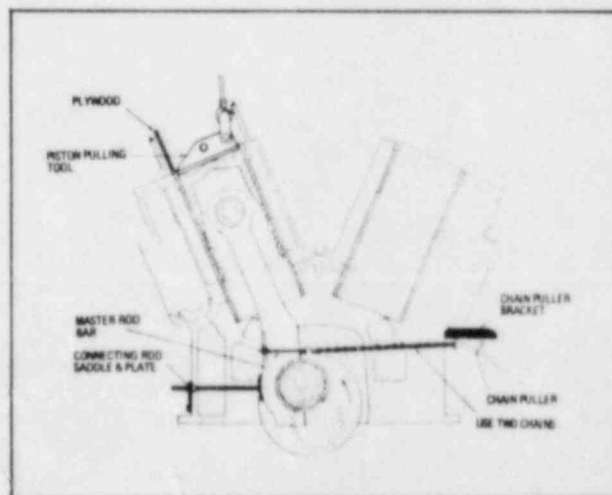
C-5. Tools Installed For Piston and Master Rod Removal.
